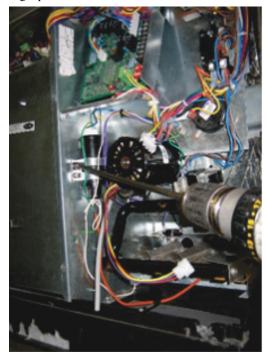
Removing Mounting Screw from Gas Manifold  $^{\rm A210076}$
